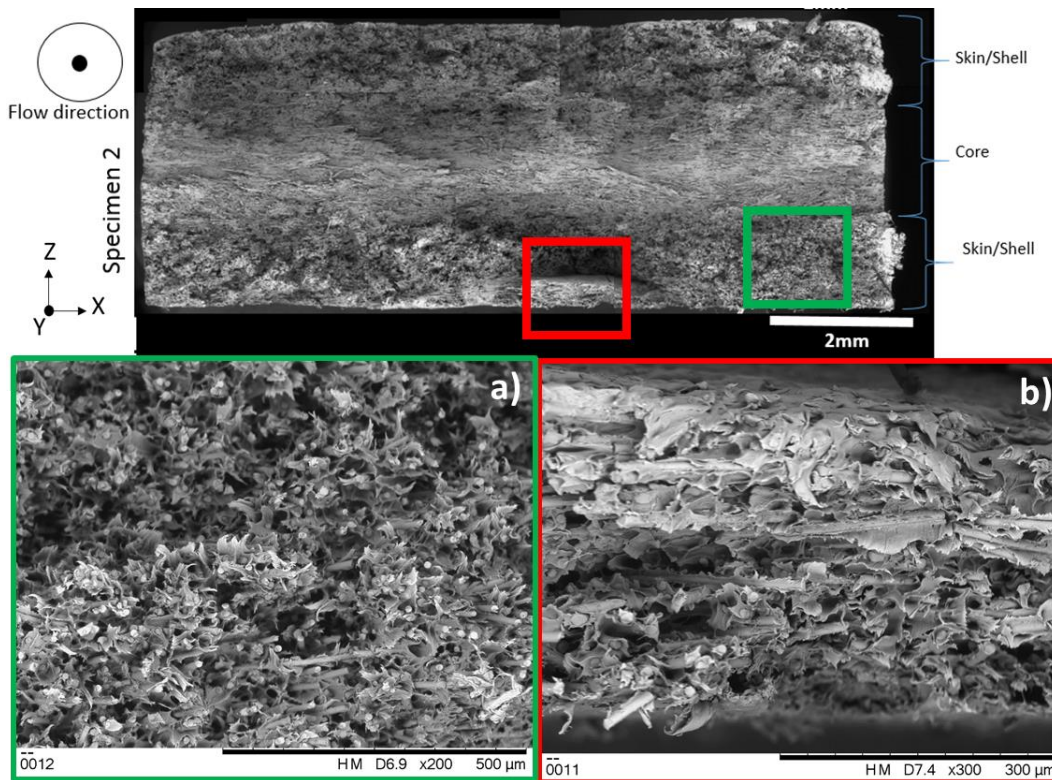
Fracture surface of 0° reference specimen 2 tested in tension and close-up images. $V_f=30\%$.
